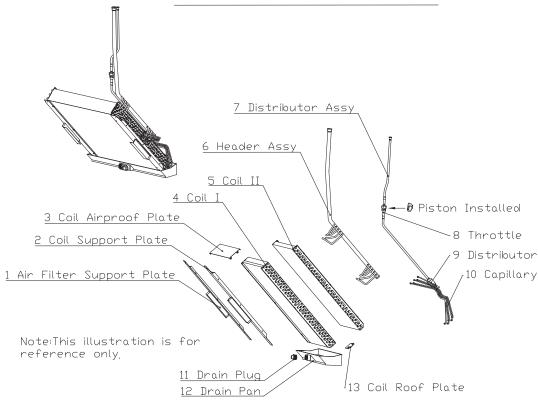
FFMA (sizes 30 & 36) Expanded View- Evaporator Parts & Drain Pan
